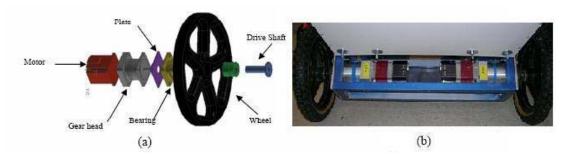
(a) CATIA Exploded View of Drive Assembly, (b) Vehicle Drive Train
